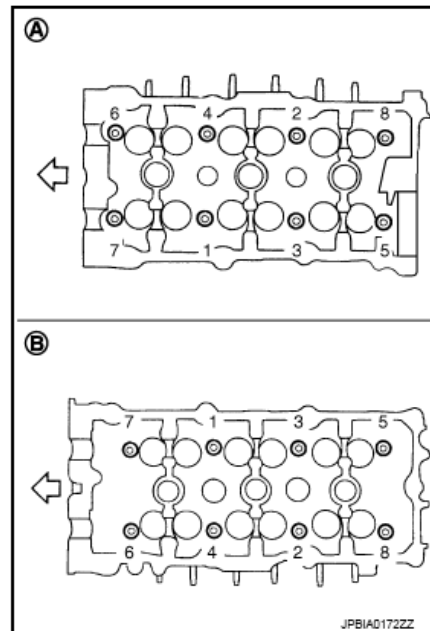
Identifying Cylinder Head Bolts Tightening Sequence
